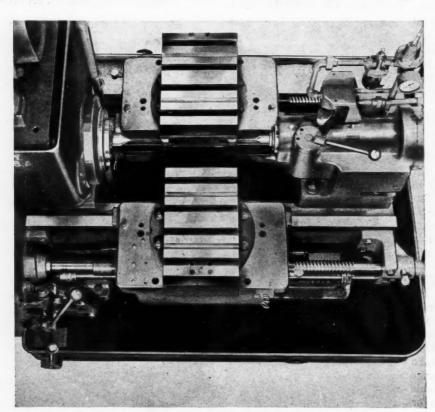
Close-up View of Front and Rear Carriages and Tool-slides of New Duomatic Shown in Fig. 1
